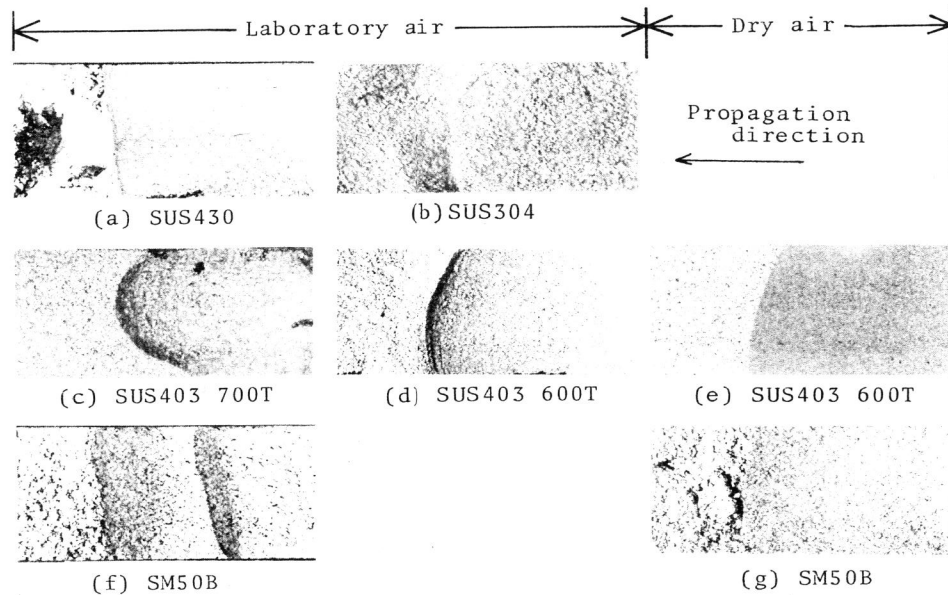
Macrographs of fracture surfaces at $R \approx 0.1$
